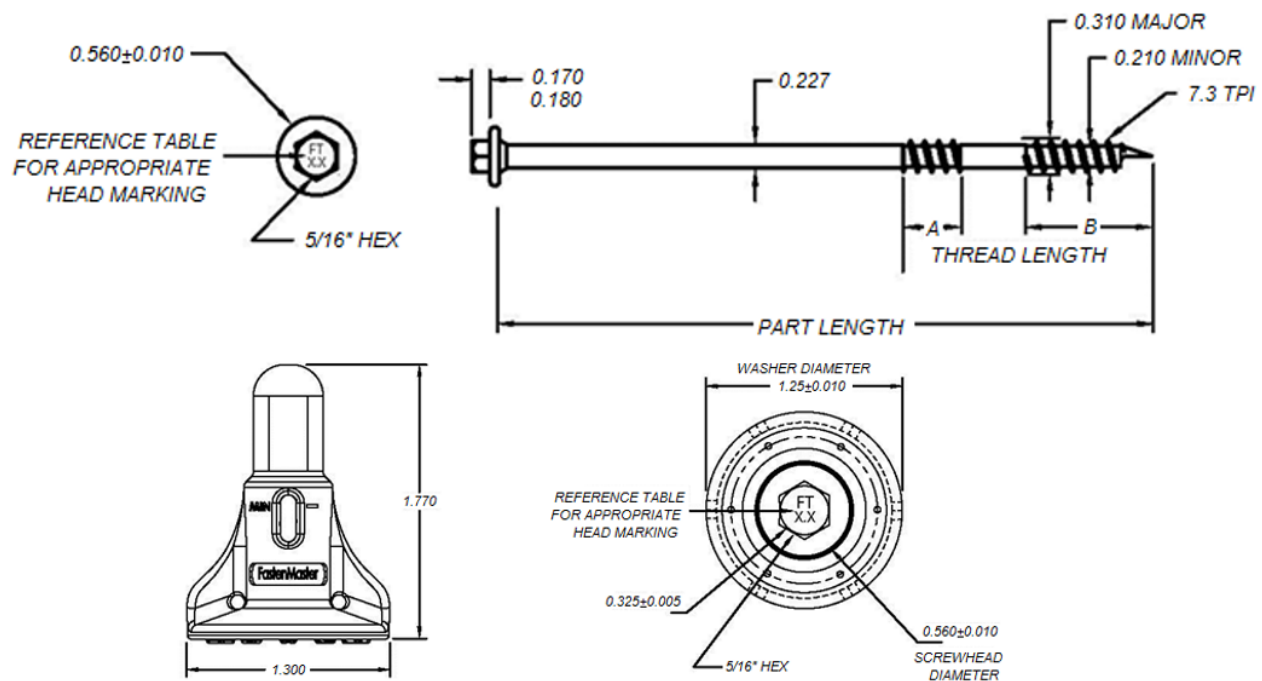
THRULOK™ SCREW BOLT FASTENING SYSTEM
